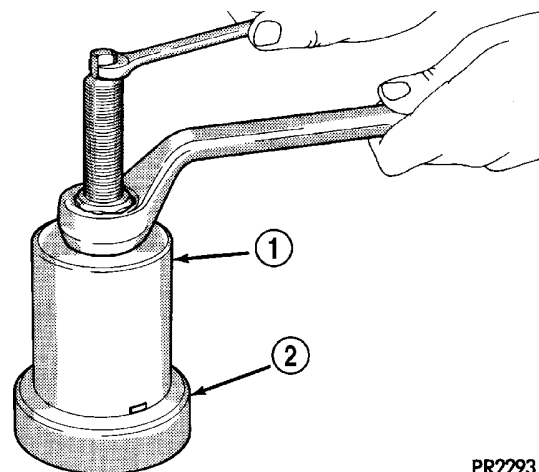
Remove Rear Planetary Annulus Gear Bearing Cone
